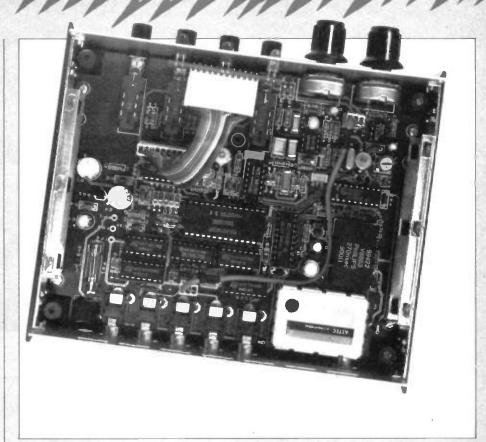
Plain view of the assembled PCB fitted into the suggested case.
